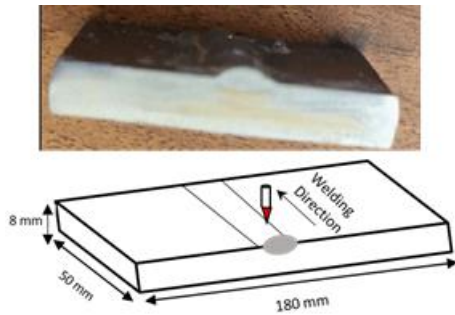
Typical sample appearance after the welding process morphology analysis
